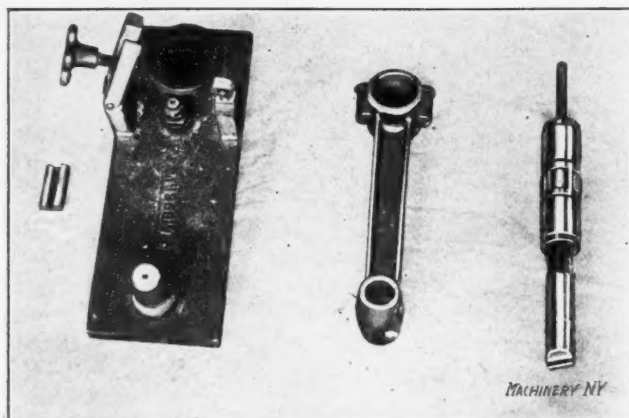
Rolling Tool and Chuck for Sizing Bronze Connecting-rod Bushings
